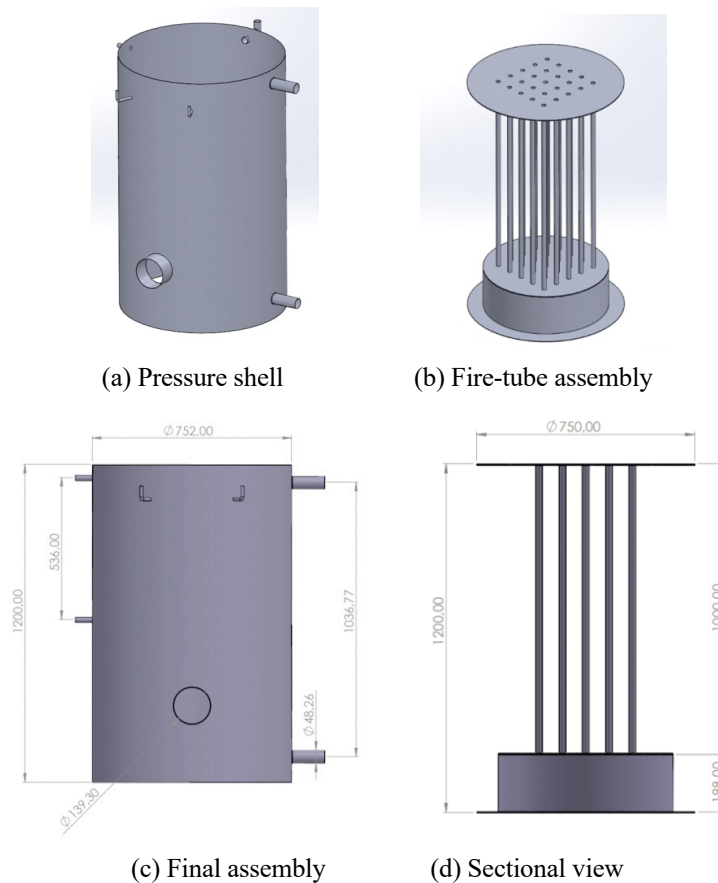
Final dimensional configuration of the designed vertical fire-tube boiler.
